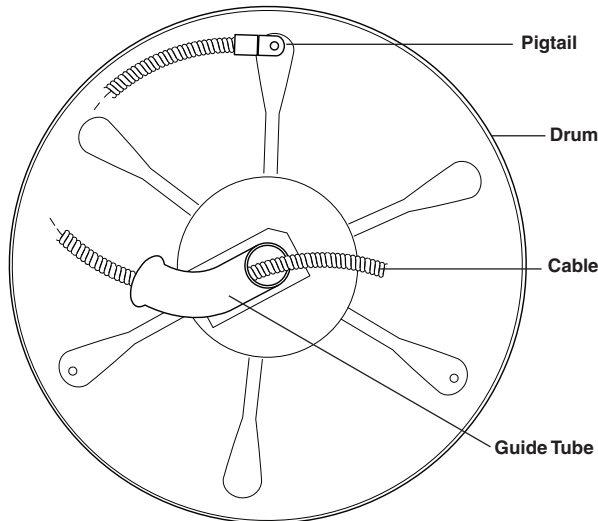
Pigtail Installation/Cable Orientation in Drum (Drum Front Not Shown For Clarity)
